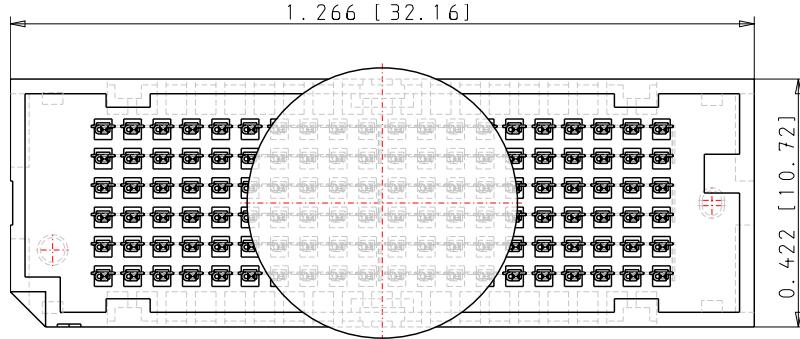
Part drawing of a LPAM 8  $\times$  50 connector
